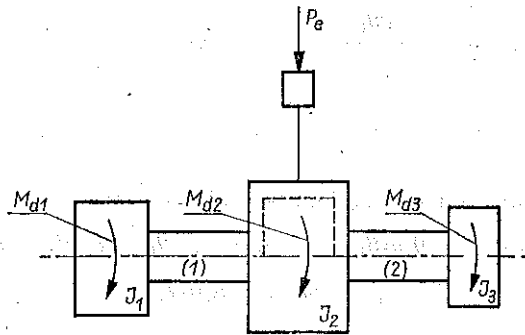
The model of a crankshaft of a one-cylinder engine.
